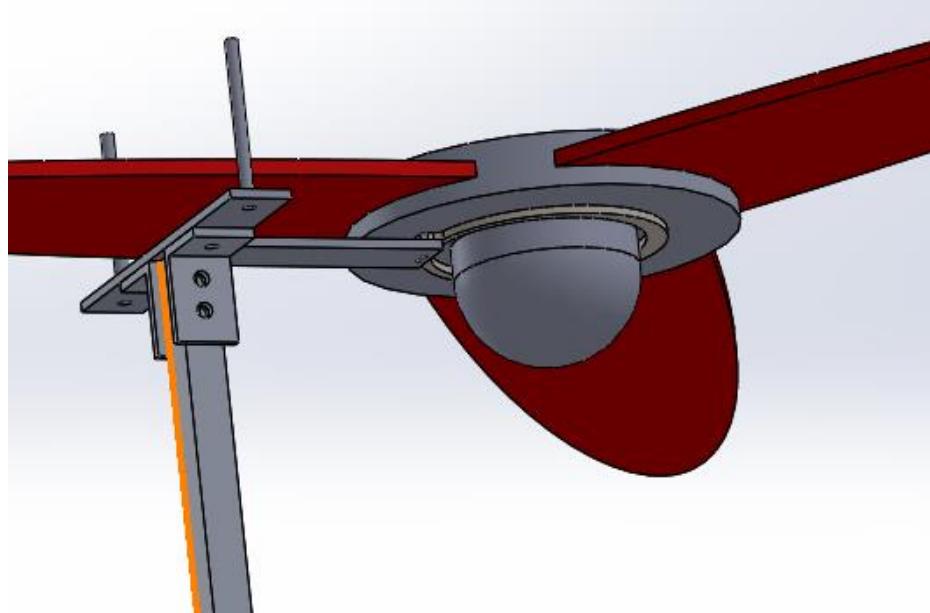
PROPELLER PLACING ON ECO BOT
